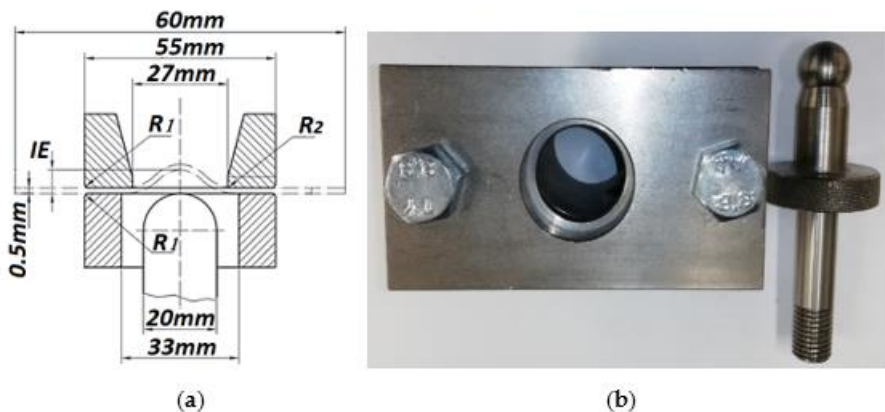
Erichsen cupping test: (a) scheme; (b) test die
